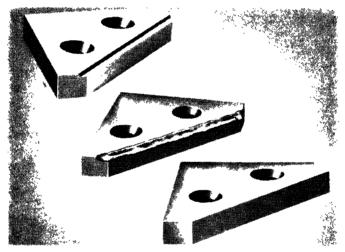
Water hardening shear blade ground, welded with oil hardening electrodes, ground to a cutting edge, and ready for use. It will last two to three times longer than the original blade
